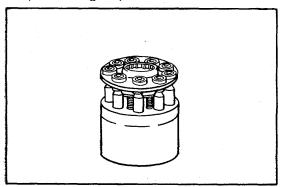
Figure 15. Set the pump on the servo housings and remove the front cover screws (refer to Fig. 15).
